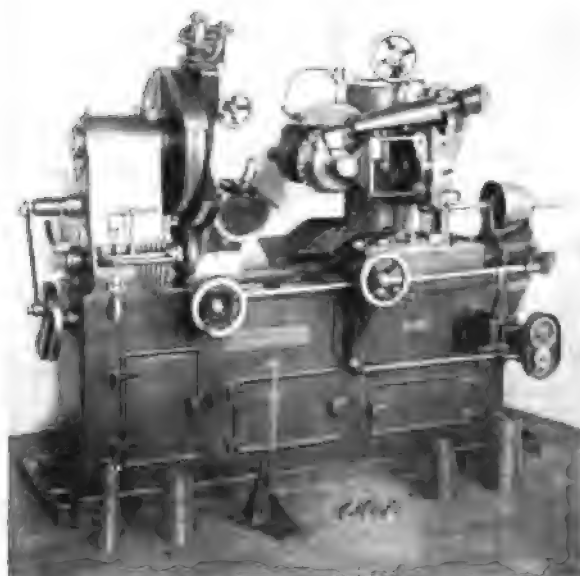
BEALE MACHINE. (Brown & Sharpe Manufacturing Co.)
